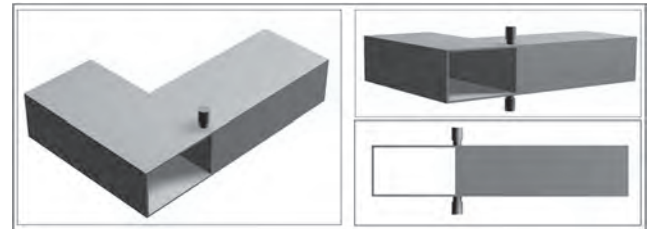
Schematic representation of the joint shown the tow tubular sections and the welding tool at the top and the bottom surfaces
